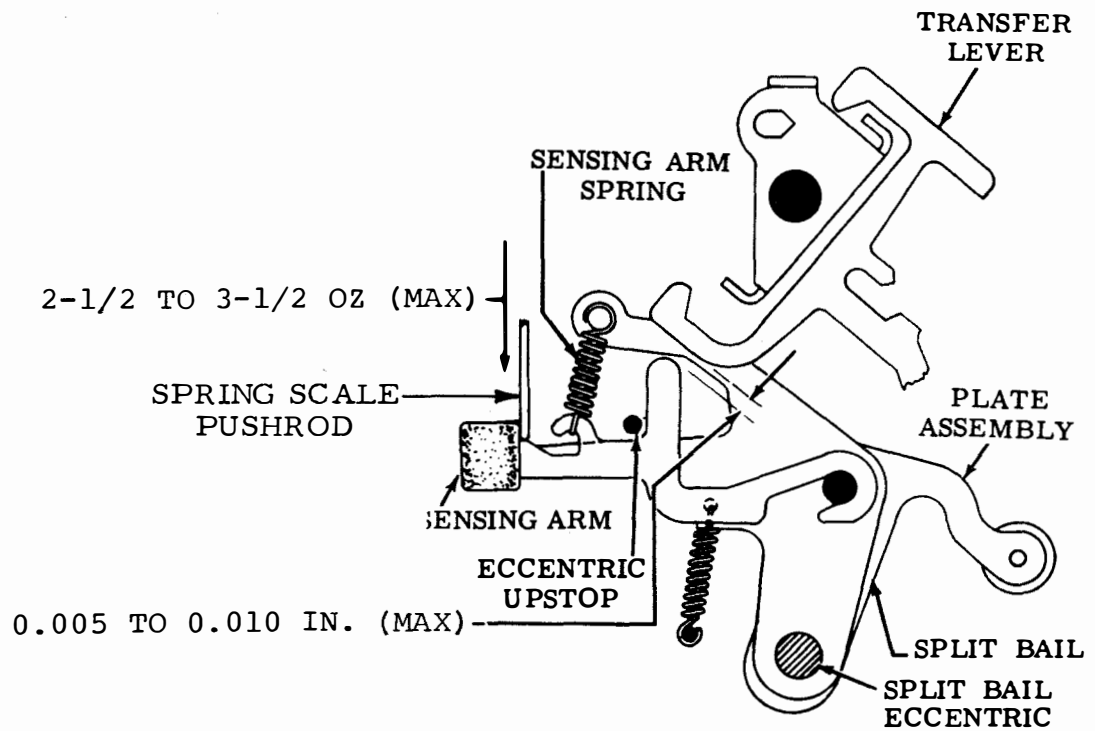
Sensing Arm - Transfer Lever Alignment, Sensing Arm Spring and Split Bail Eccentric, Front View
